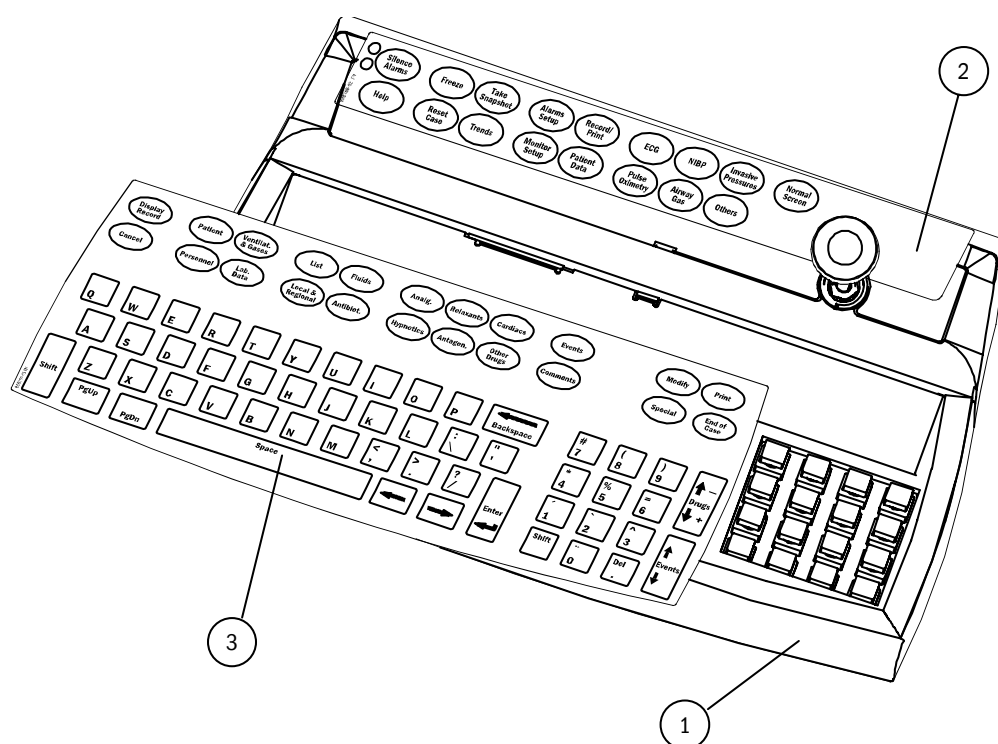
Exploded view of the Anesthesia Record Keeping Keyboard
